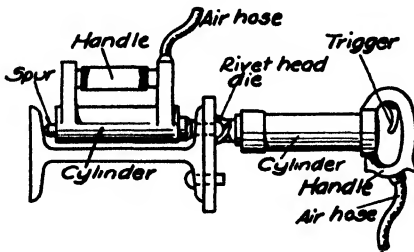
Pneumatic Bucker-up and Riveting Gun, Used in Riveting a Plate to an I Beam.
